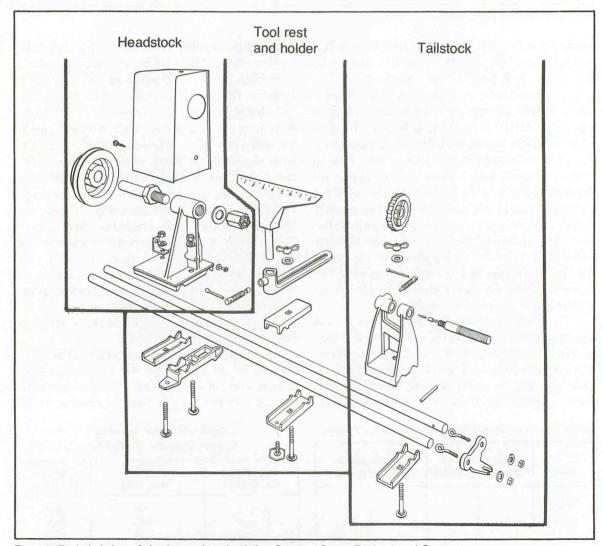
Exploded view of simple wood-turning lathe. Courtesy Sears, Roebuck and Company.
